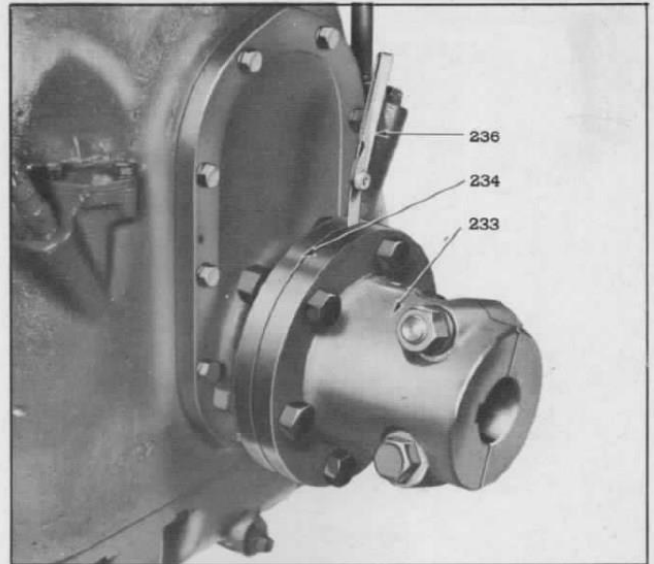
Checking Engine to Propeller Shaft Coupling Alignment with Feeler Gauge
